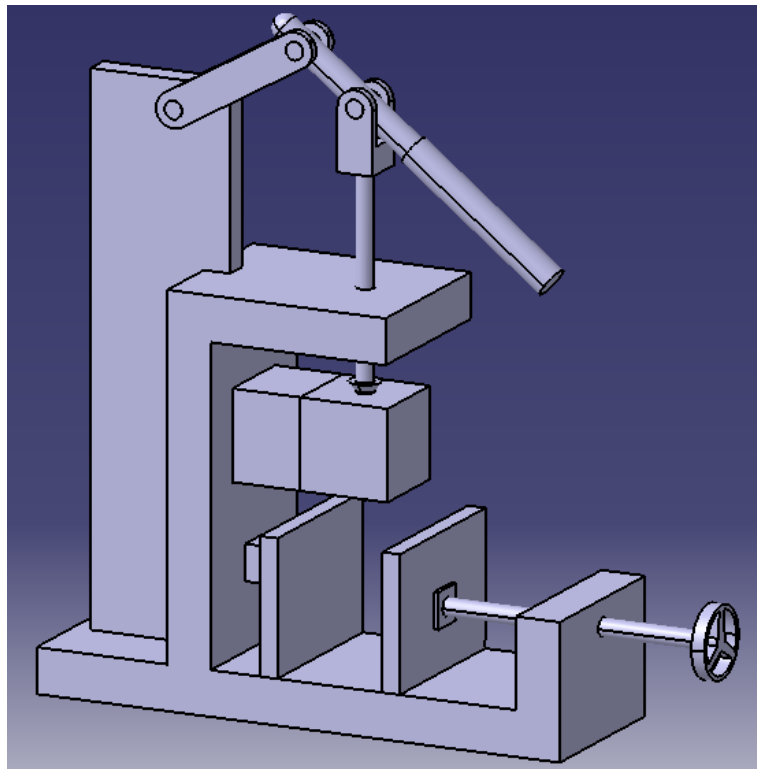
Design 1 Mini Micro Injection Moulding Machine
